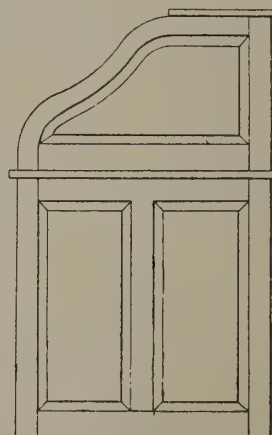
End Elevation of Desk—Scale 9/16 In. to the Foot
